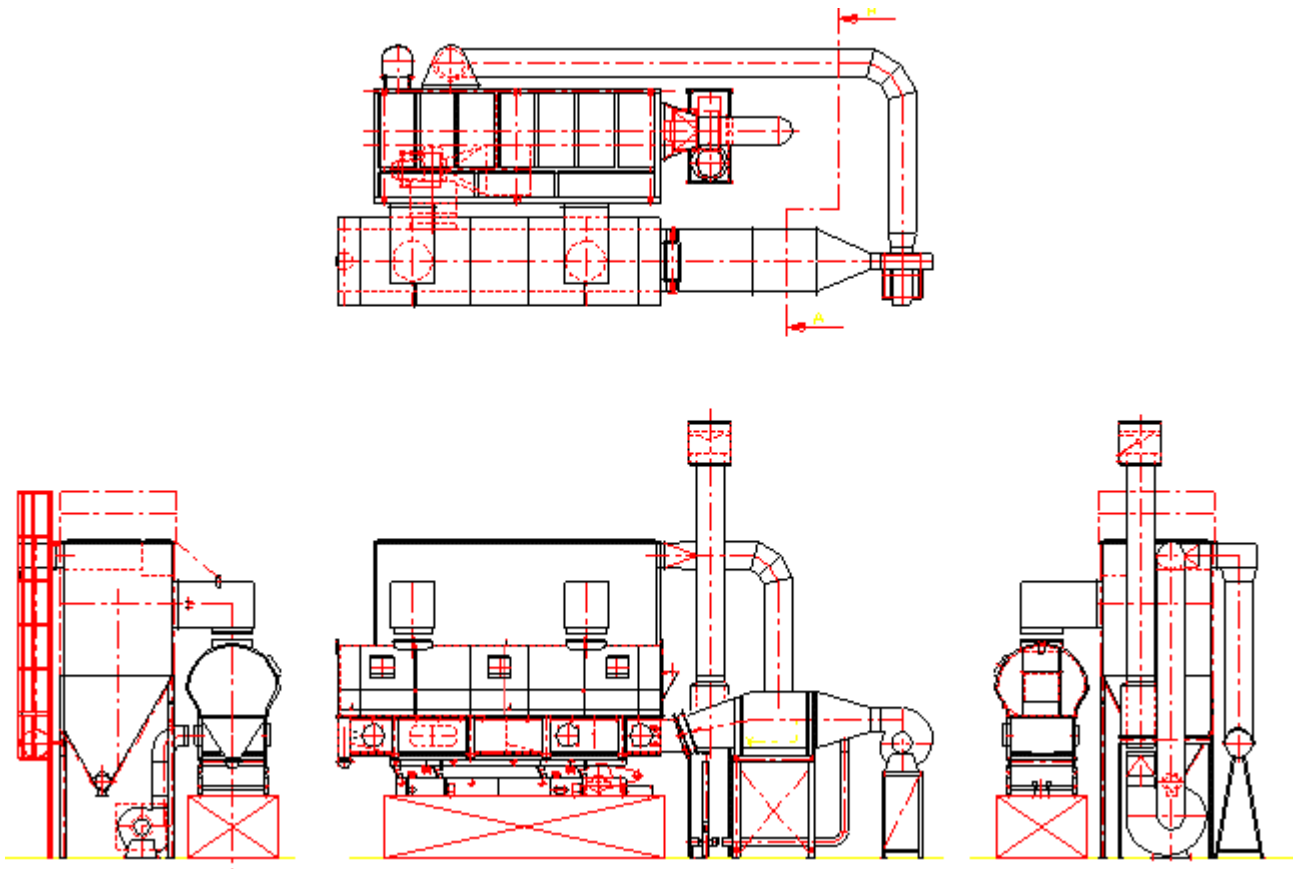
Layout of a dryer/cooler for sand without recirculation of cooler exhaust air.
